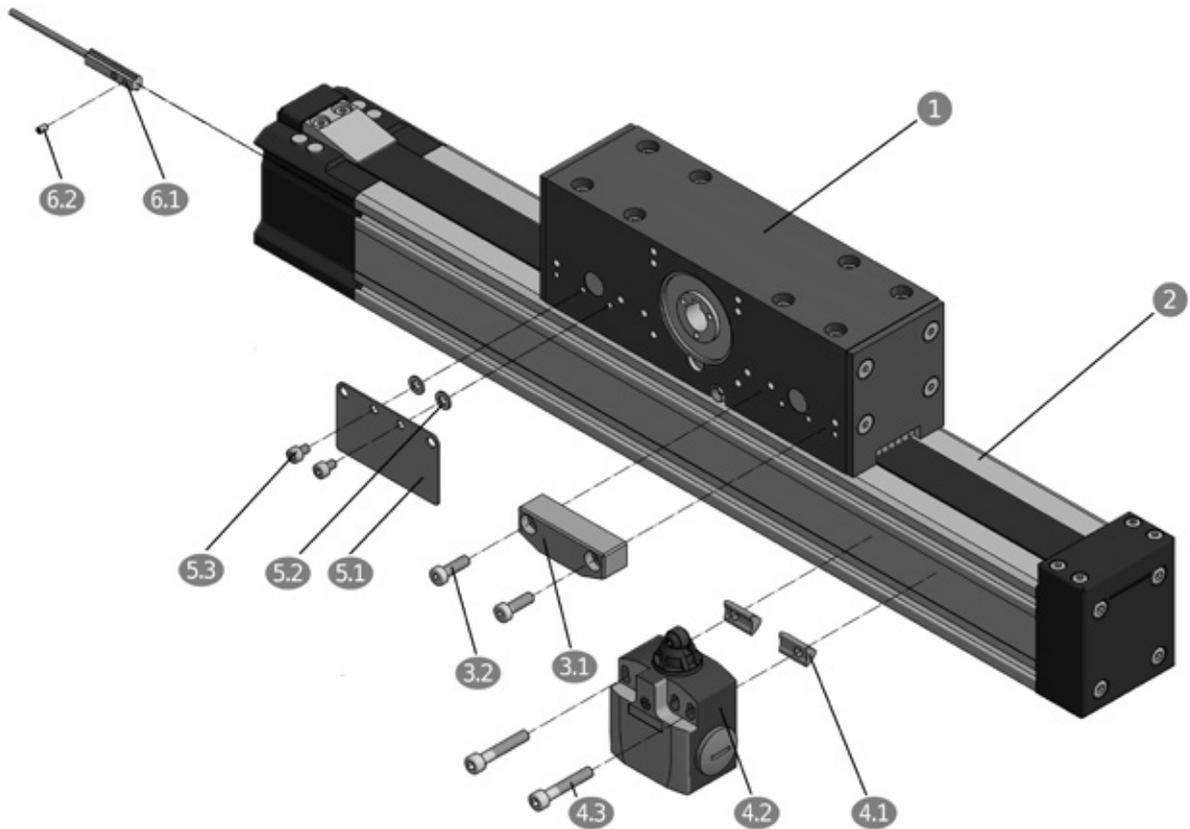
Mounting of limit switches on the profile of Linear Axis AXE_A with moved drive head
